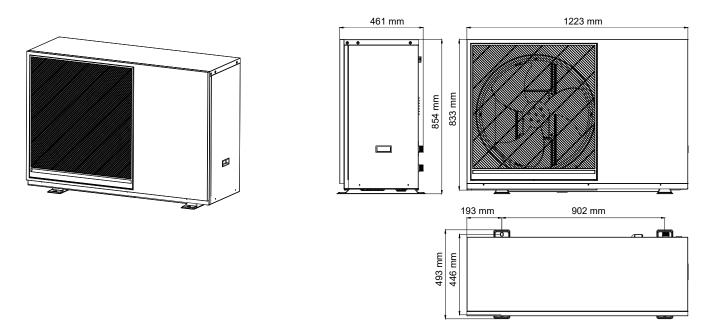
HPR290i65 & HPR290i90 heat pump dimensions
